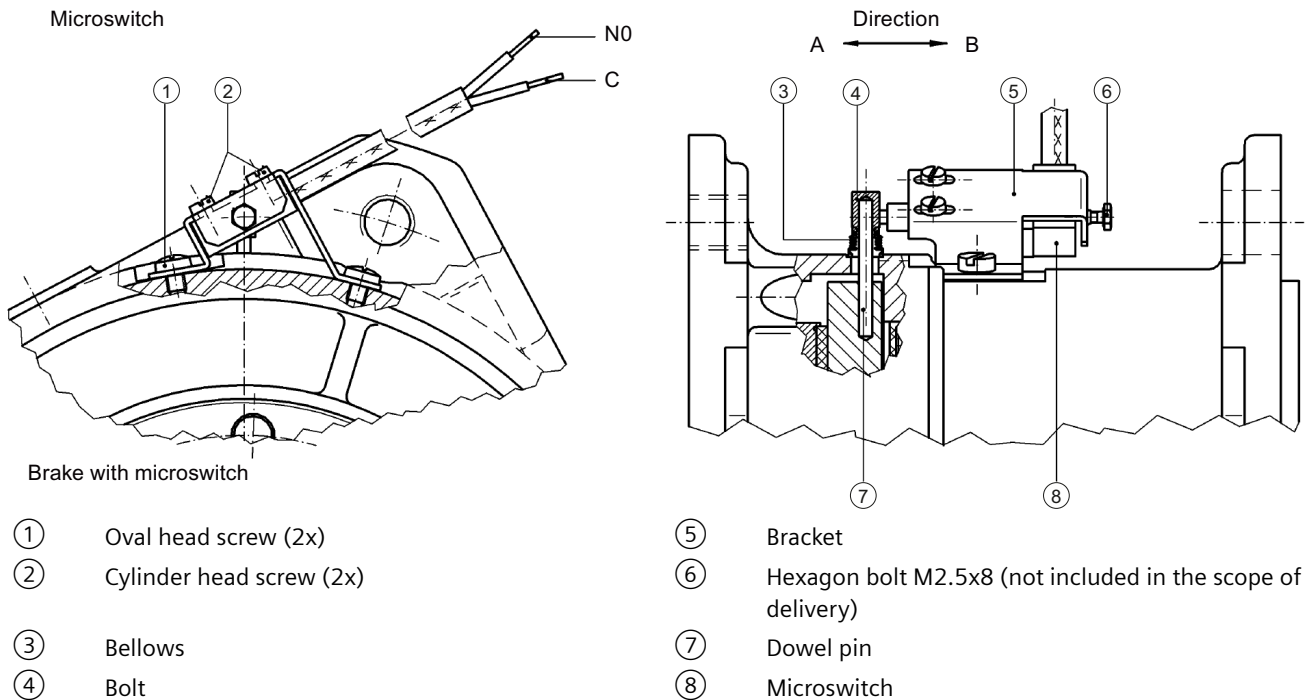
Microswitch mounting of a single-disk spring-operated brake module 77 500...B15
